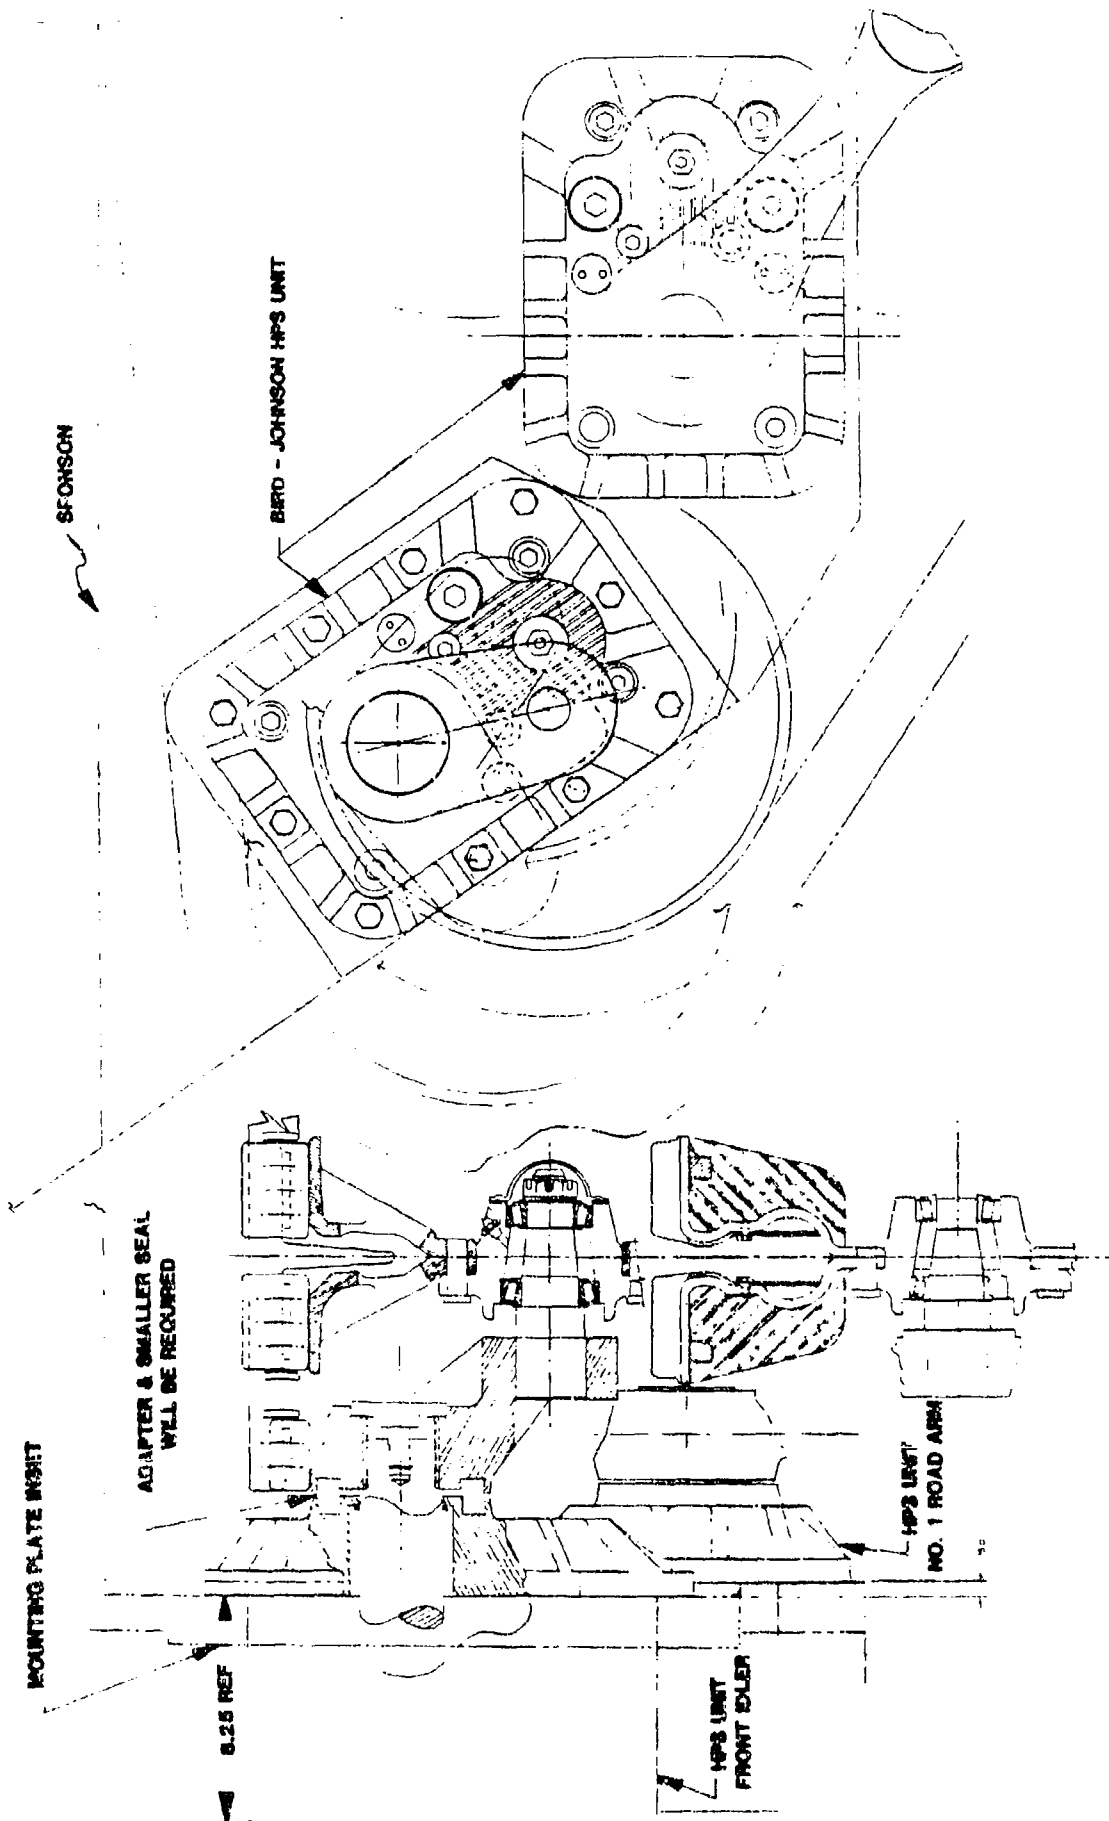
Bird-Johnson HPS Unit Idler Mount
